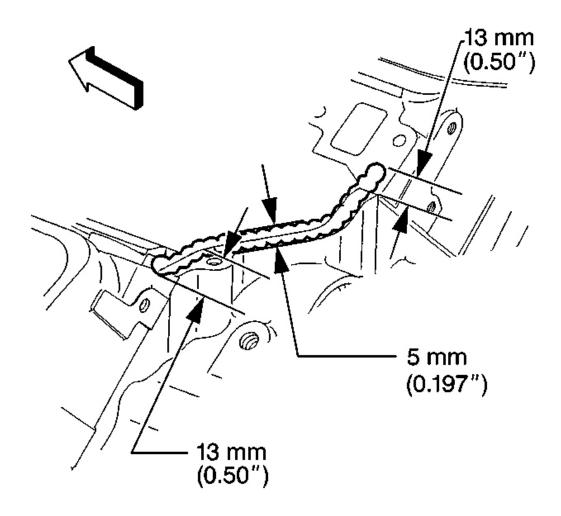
Applying Adhesive To Rear Top Of Engine Block Courtesy of GENERAL MOTORS CORP.
